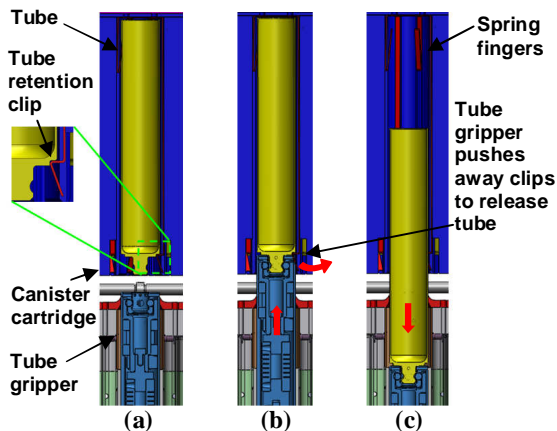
Removing a sample tube from the sample canister: (a) Tube gripper positioned under sample tube, (b) tube gripper extended to and attached to tube, (c) tube retracted from canister into handling arm.
